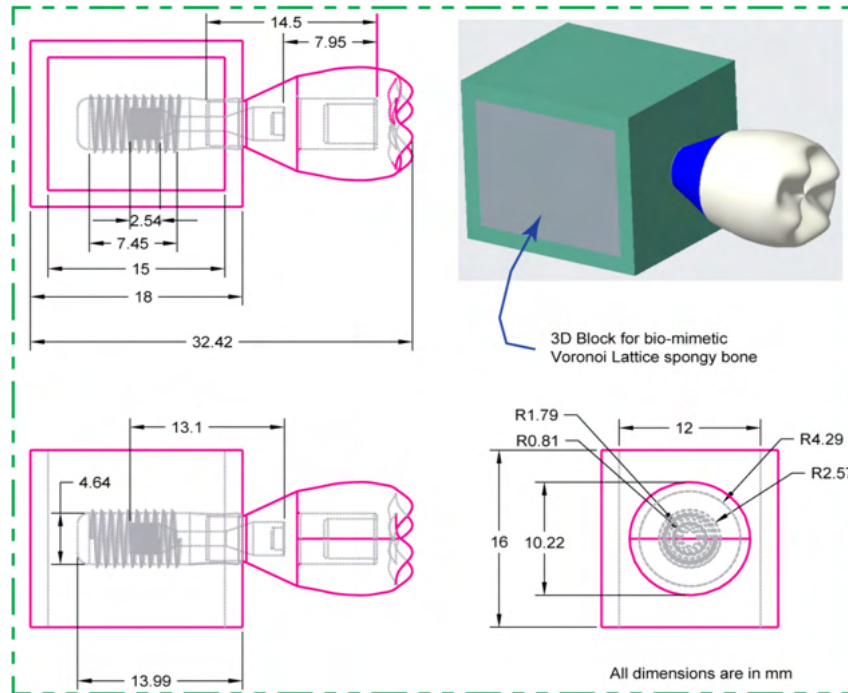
2D drawing of dental implant assembly in Creo parametric: front, side, and top views with detailed dimensions (mm).
